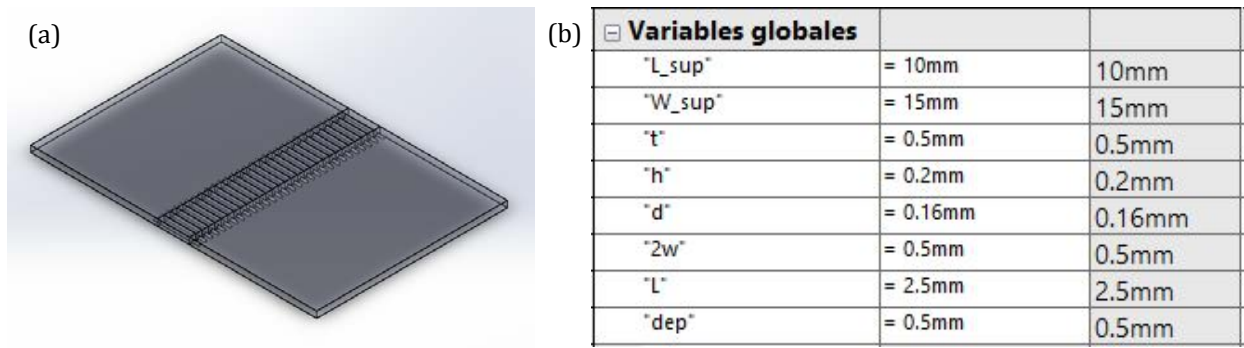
SolidWorks model (a) example of a test sample CAD design, (b) parameters used to change the sample geometry.
